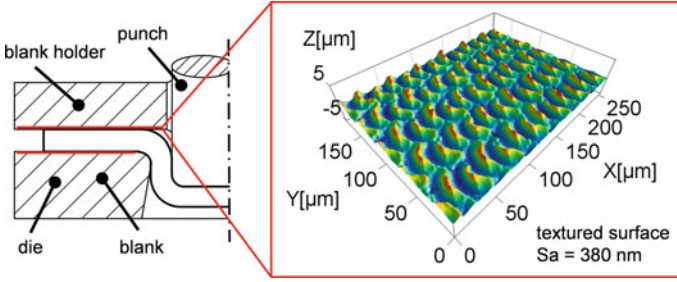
Dry friction in a mold used for micro-cold forming
